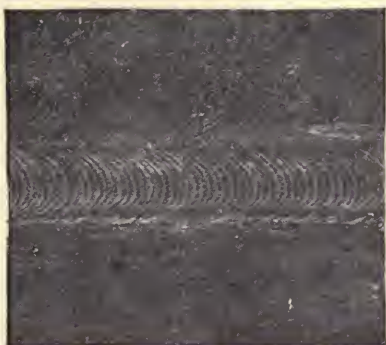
Photograph of weld obtained on a Trambouze machine, actual size (plates  $\frac{3}{8}$  in. thick).
